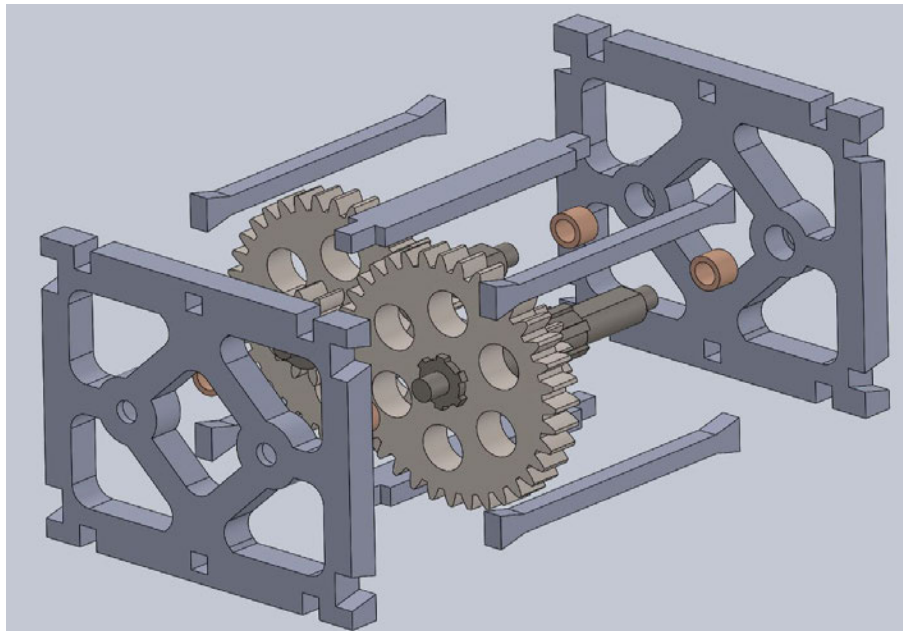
Exploded view of the gearbox assembly made in CAD. All housing components, shafts, gears, and bearings are shown.
